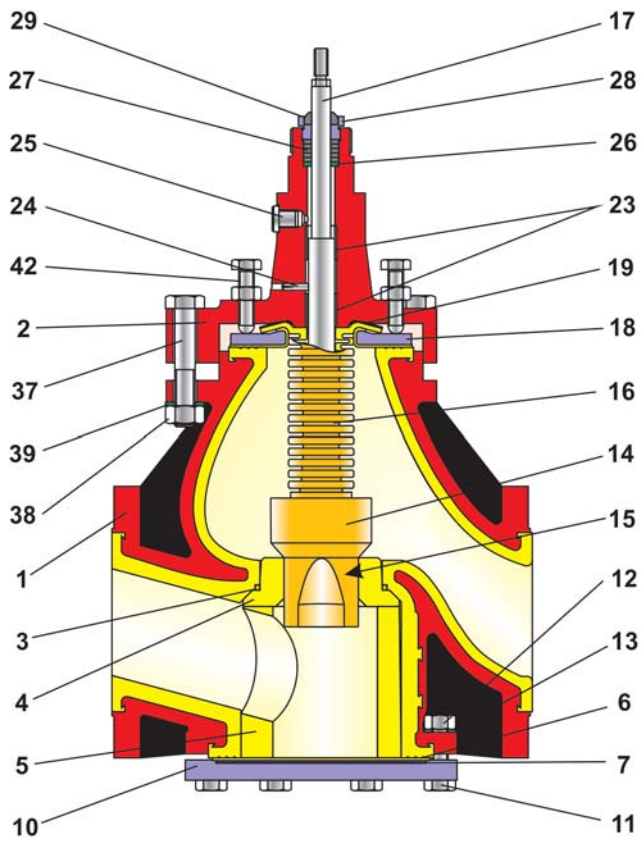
Sectional diagram through a DIN control valve (DN 80 and larger)
